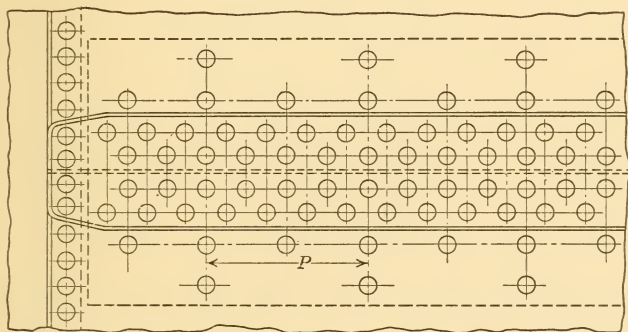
Quadruple-riveted, double butt-strapped joint.
